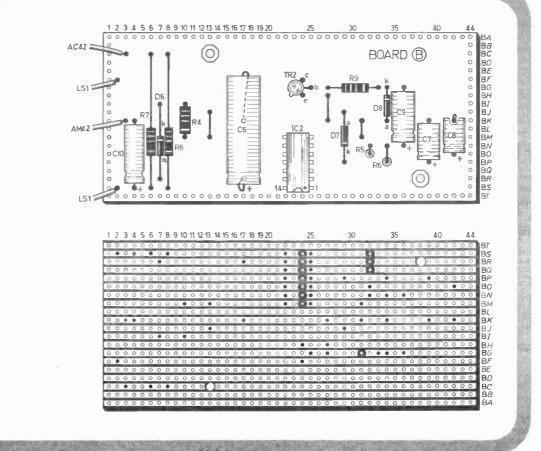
Component layout for Board B (Two-tone oscillator). Board B can be replaced by another warning device connected to positions AC42 and AM42 if required. These latter items should not be positioned too close to mains wires or components or you could get false triggering problems. Do not wire in VR1 at this stage.
